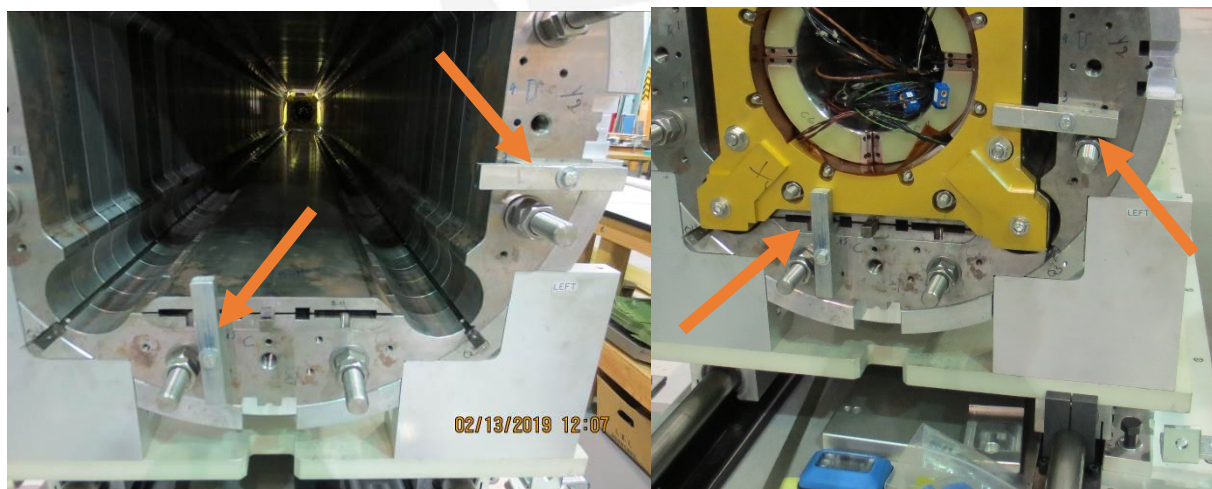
Stoppers for the coil pack on the RE side of the shell-yoke assembly
